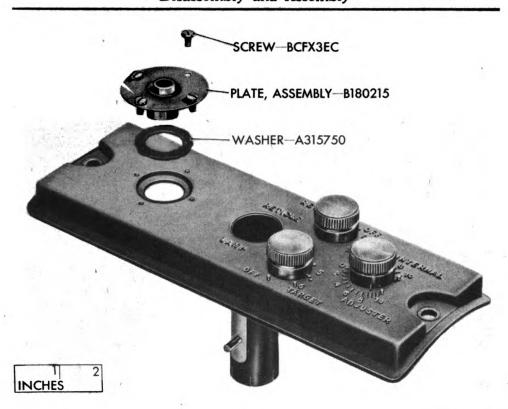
Range Knob Plate Assembly Exploded From Range Knob Housing
